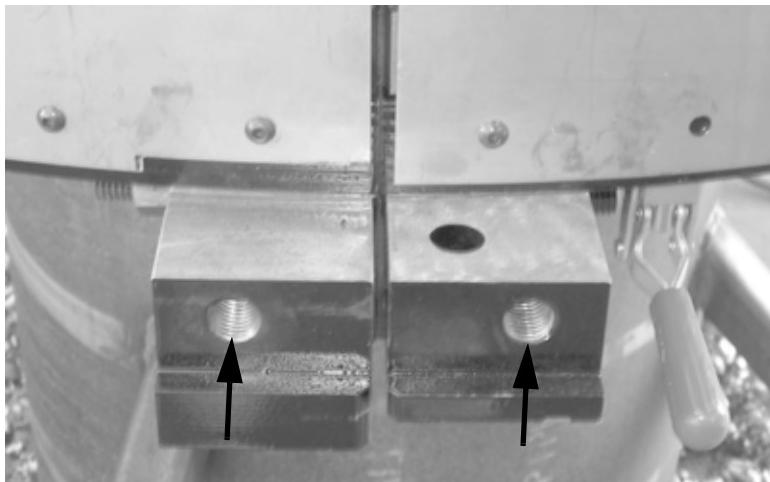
The hinge side of the frame has two threaded holes for attaching the hinge.
